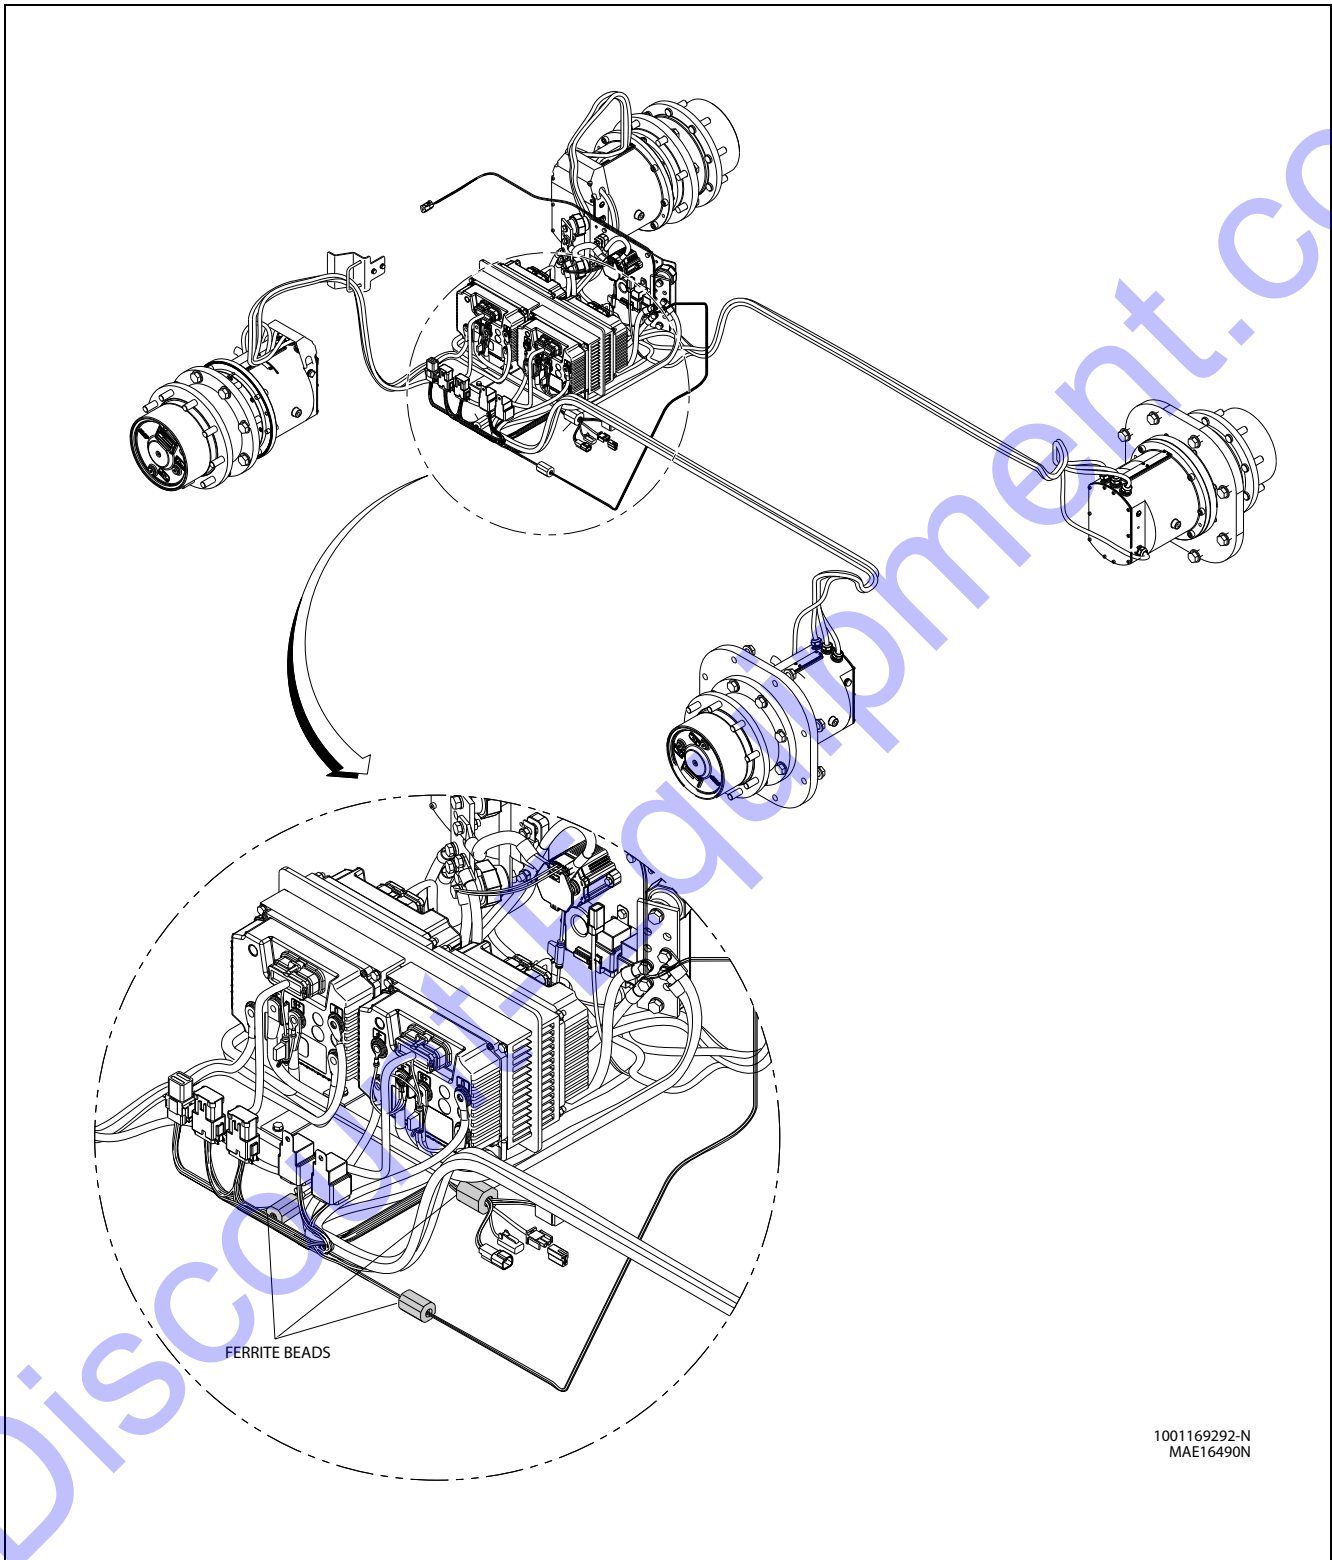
Ferrite Beads - Drive Cables (Prior to SN 0300236472)
